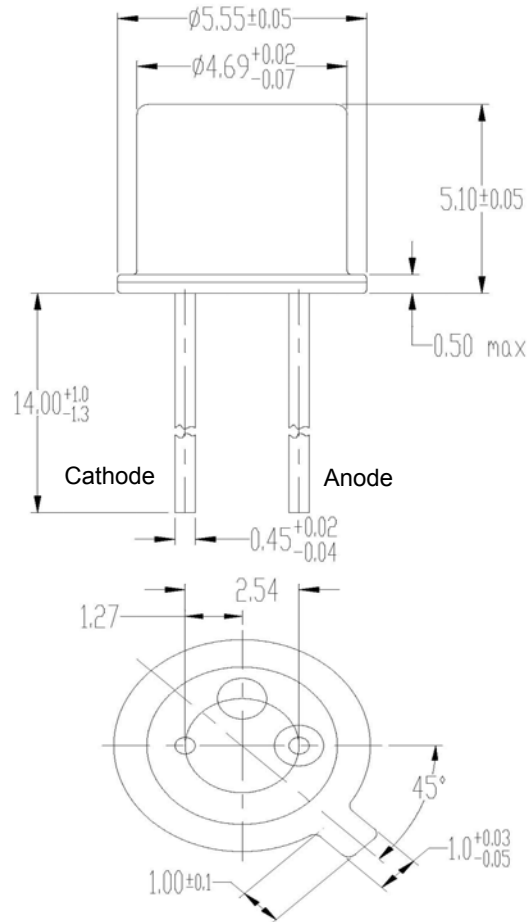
TO18 Package Outline Drawing (Unit: mm)
